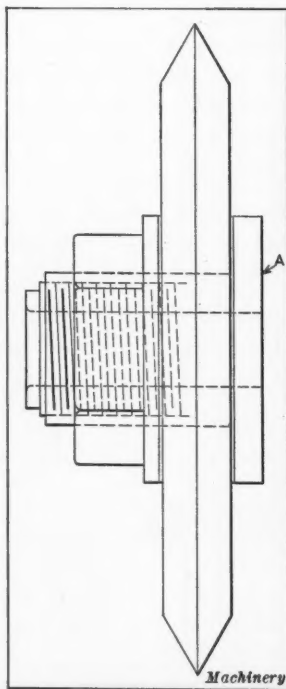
Method of mounting Grinding Wheel to insure Accuracy and reduce Dressing
